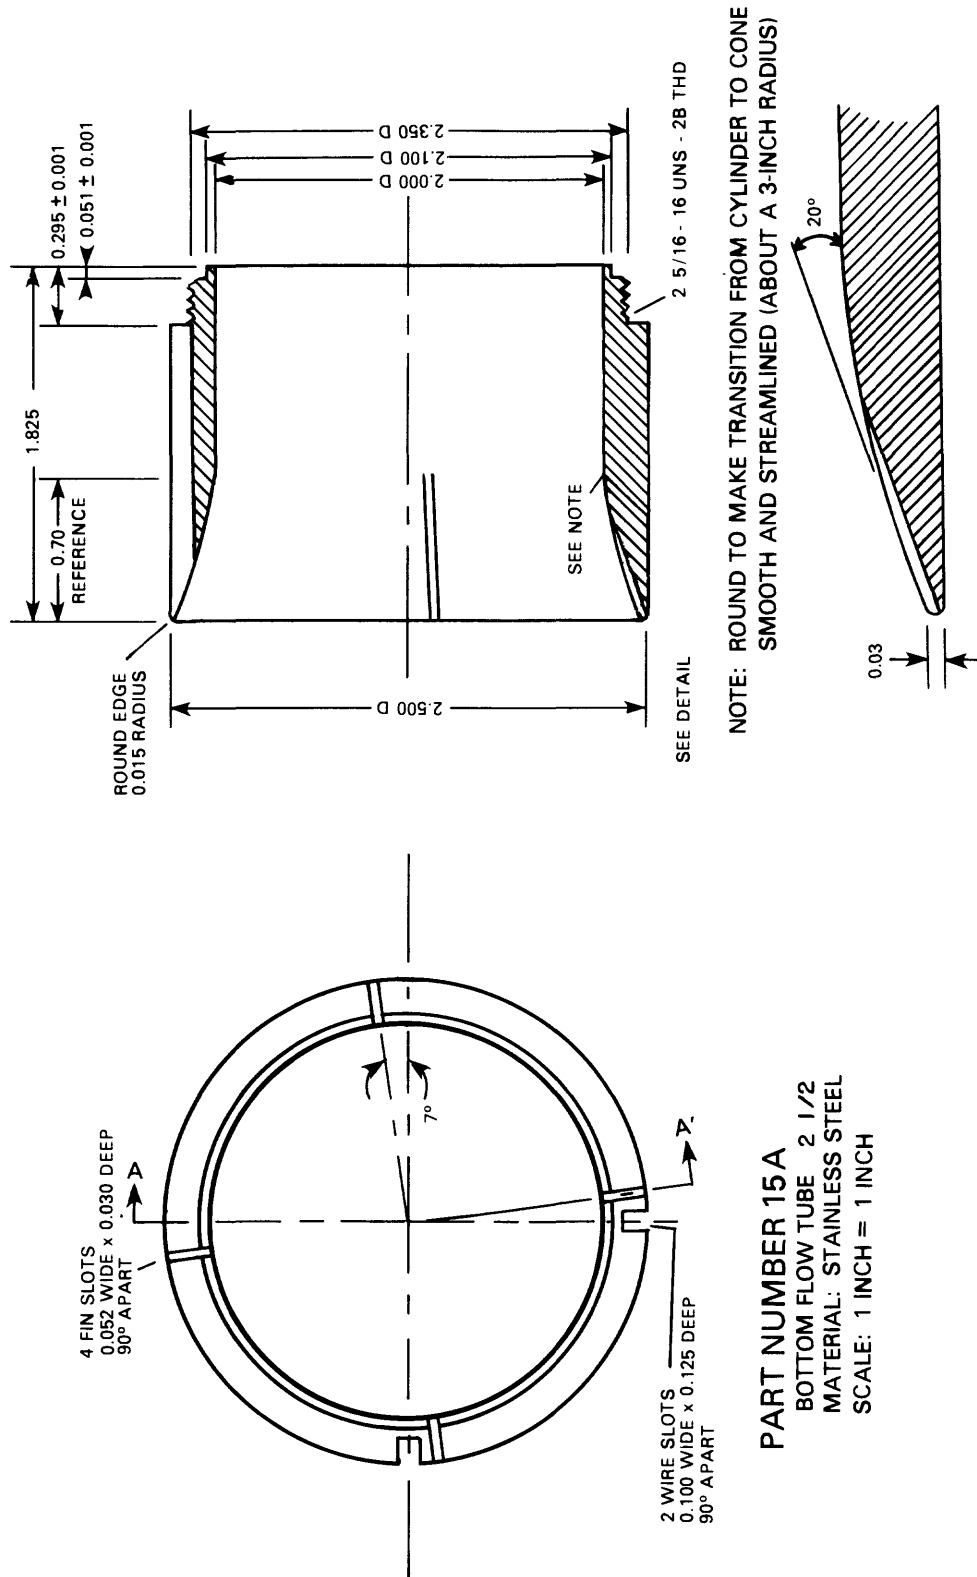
PN-15A, bottom flow tube, 2 1/2.
